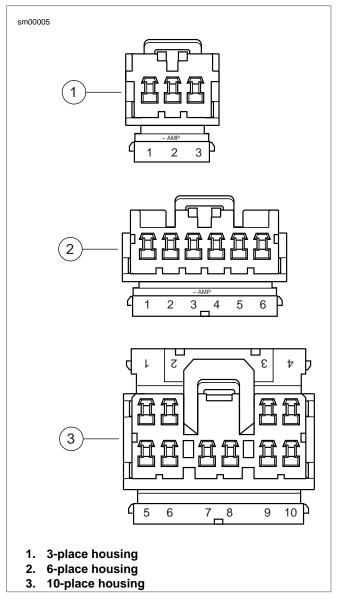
Tyco 070 Multilock Unsealed Connector: Cavity Numbers on Secondary Locks (socket housings shown)
